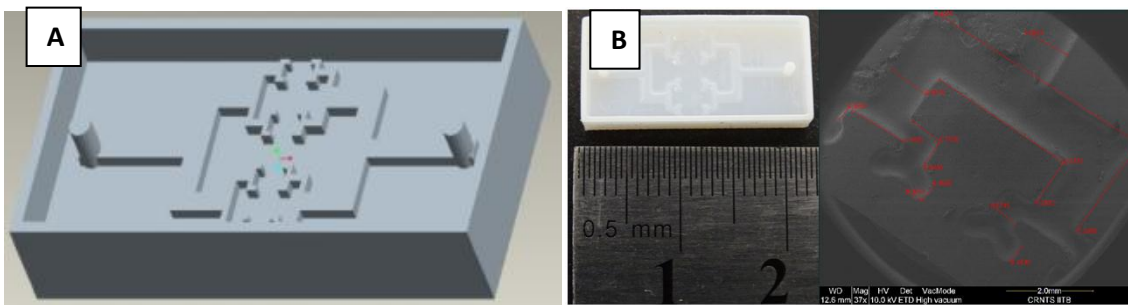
A) ProE design of mold B) 3-D printed mold in polycarbonate (Top left) and SEM image of mold with feature dimensions in millimeter (right)
